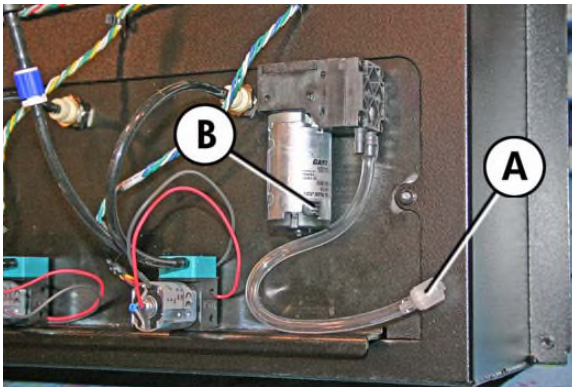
Pressure pump (B) on FB950. (A) is the connector for the long pressure tube in the track. This view is from inside the printer with the pump plate fully installed. Newer H-series without the valve (A in Figure 31) will match this appearance also.
